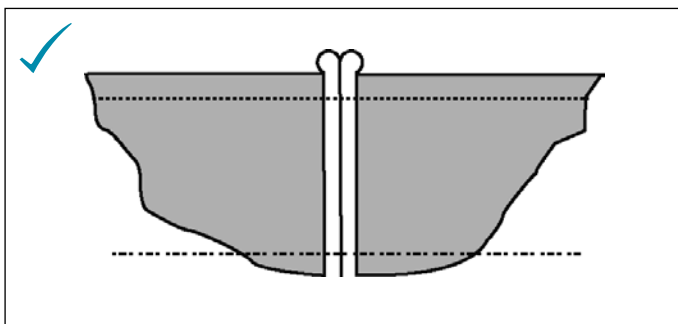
Butt-weld with big welding beads (acceptable)
